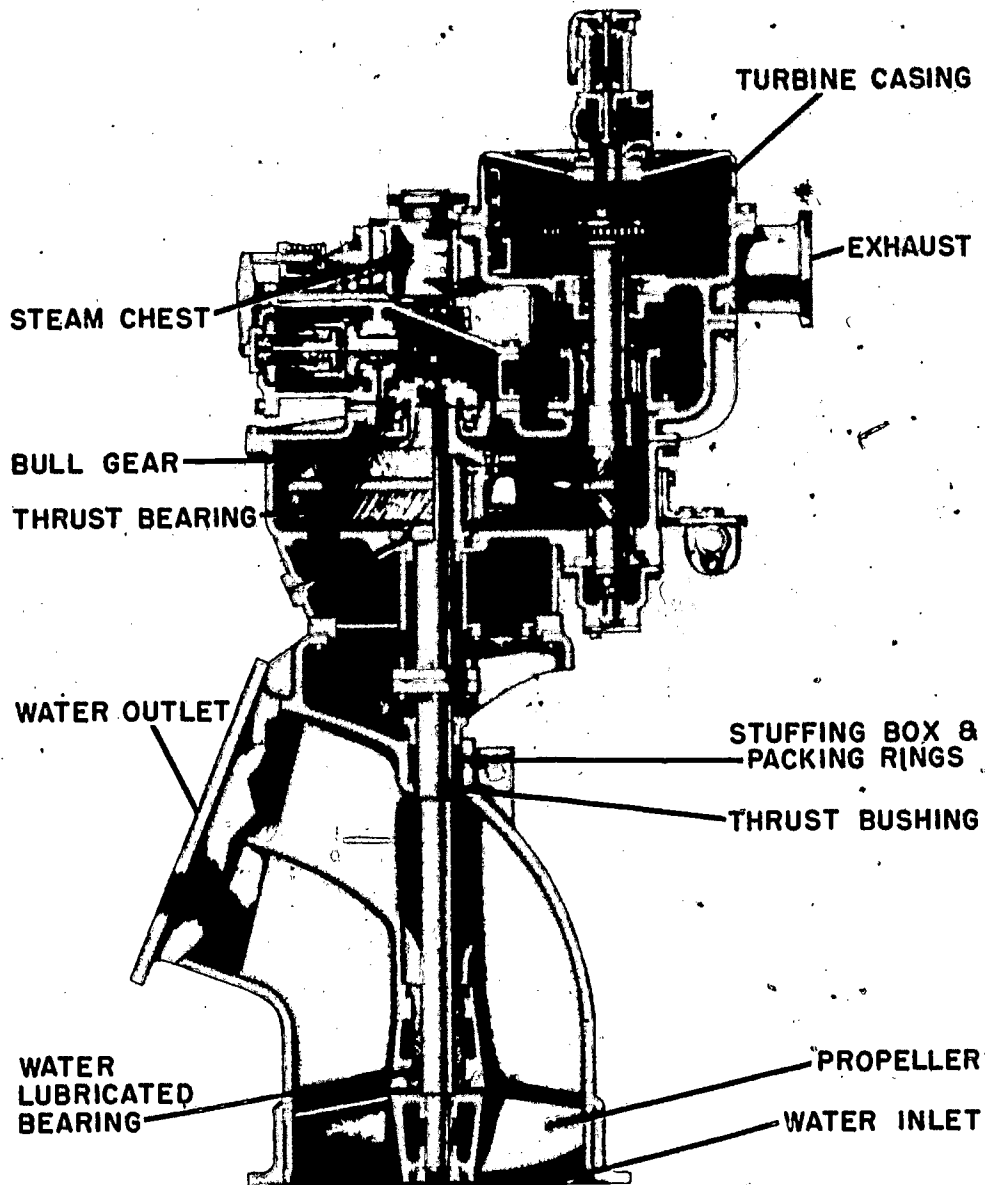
Main condenser circulating (propeller) pump (showing reduction gearing).
